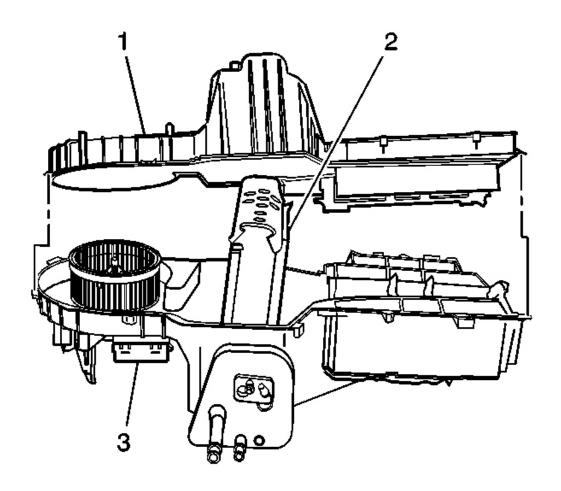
View Of HVAC Module Assembly Halves Courtesy of GENERAL MOTORS CORP.
